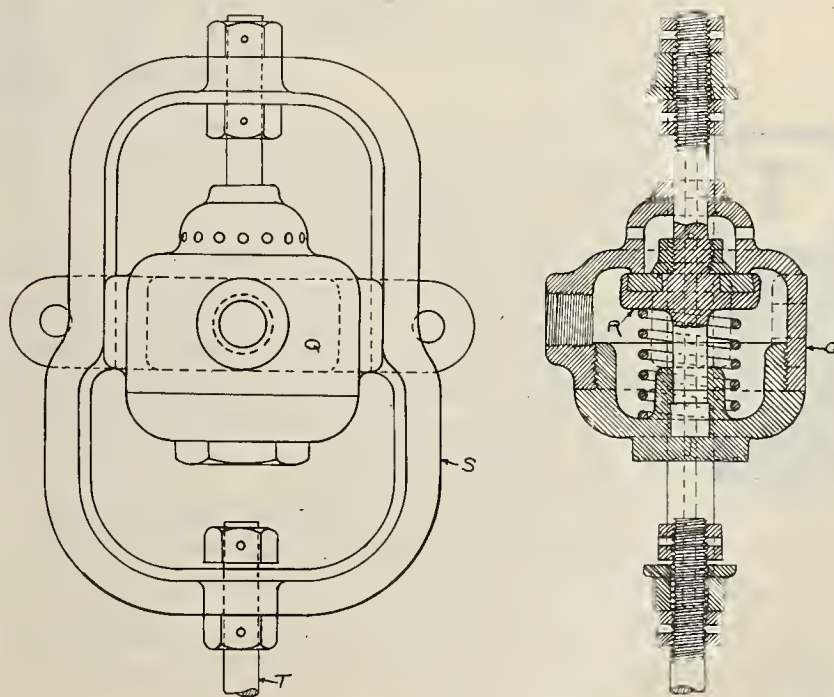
DEVICE FOR REGULATING THE BRAKING POWER OF CARS.
